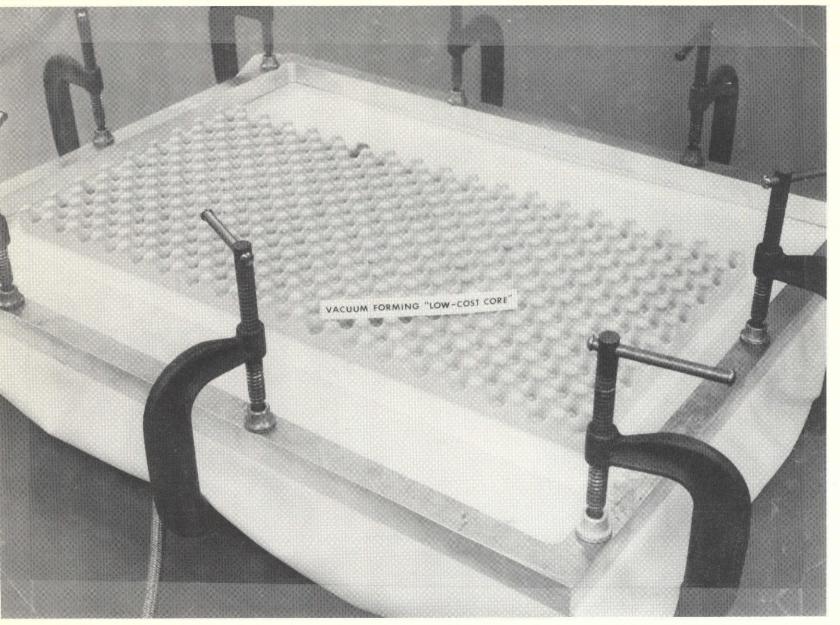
Vacuum-Forming—Application of Atmospheric Pressure Forming Rubber Diaphragm to Form Material Into Mold Cavities
